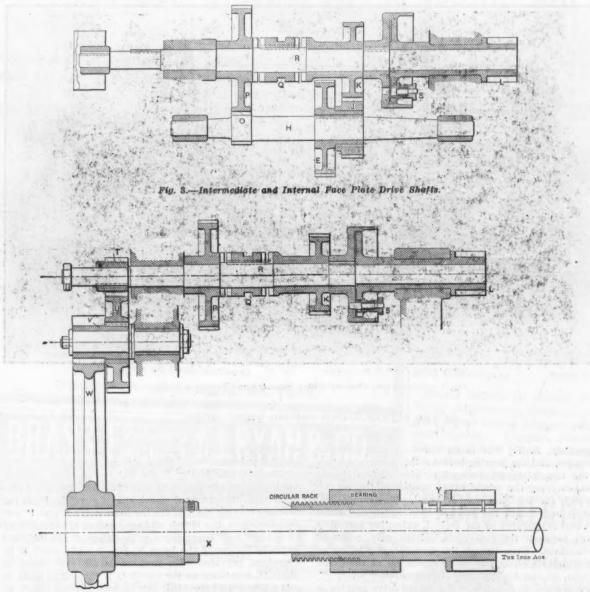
Gearing for Esternal Driving of Both Face Plates.
